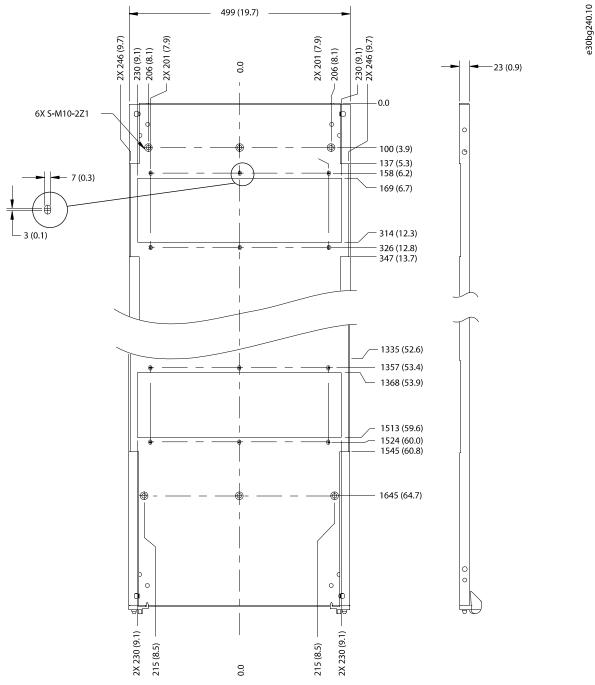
Vent Dimensions for Mounting Plate in 600 mm (24 in) Enclosure
